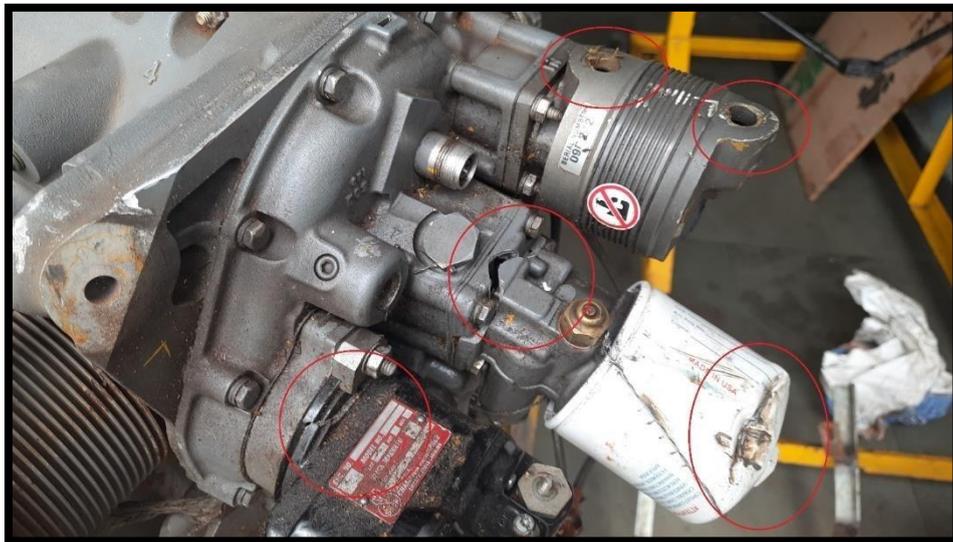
Magneto (LH), Oil filter adapter, oil filter & Vacuum pump.
